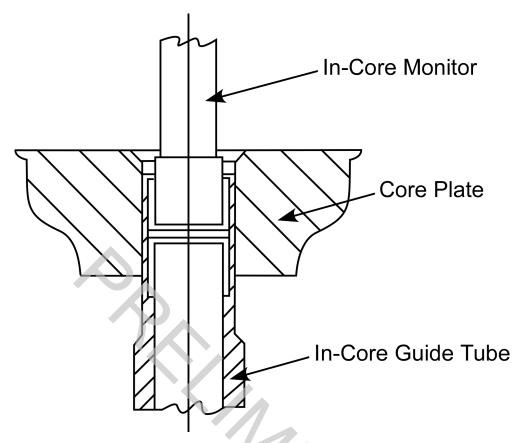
Typical Connection Between In-Core Guide Tube and Core Plate
